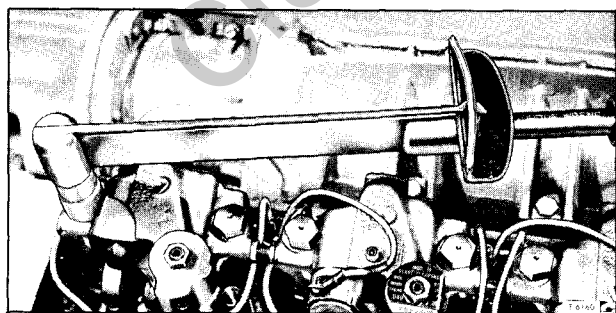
Torquing Housing Hold-Down Bolts (8V-71 Engine Shown)
